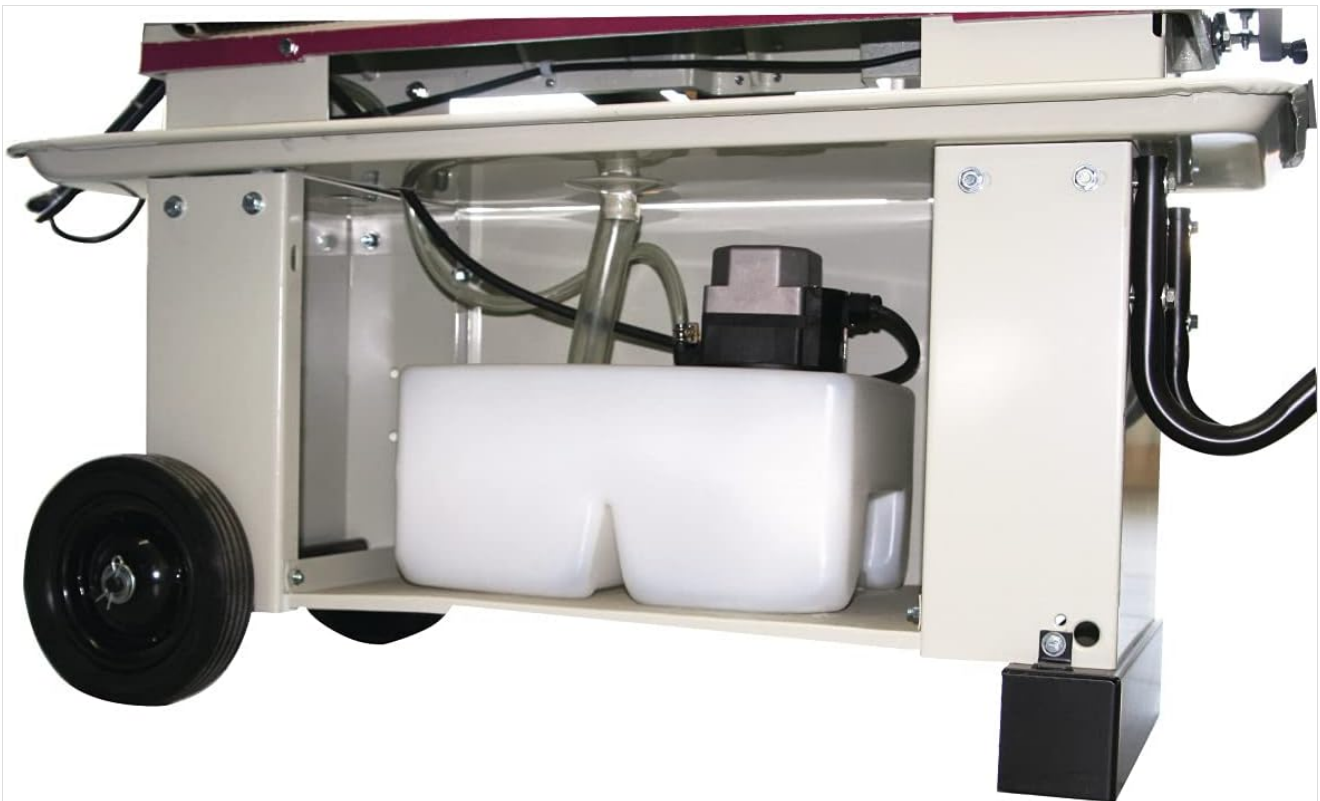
Coolant System Reservoir. A view of the integrated coolant tank and pump located within the machine's base. This system is essential for cooling the blade and workpiece during cutting, extending blade life and improving cut quality. The image shows the reservoir where coolant is stored and circulated.
